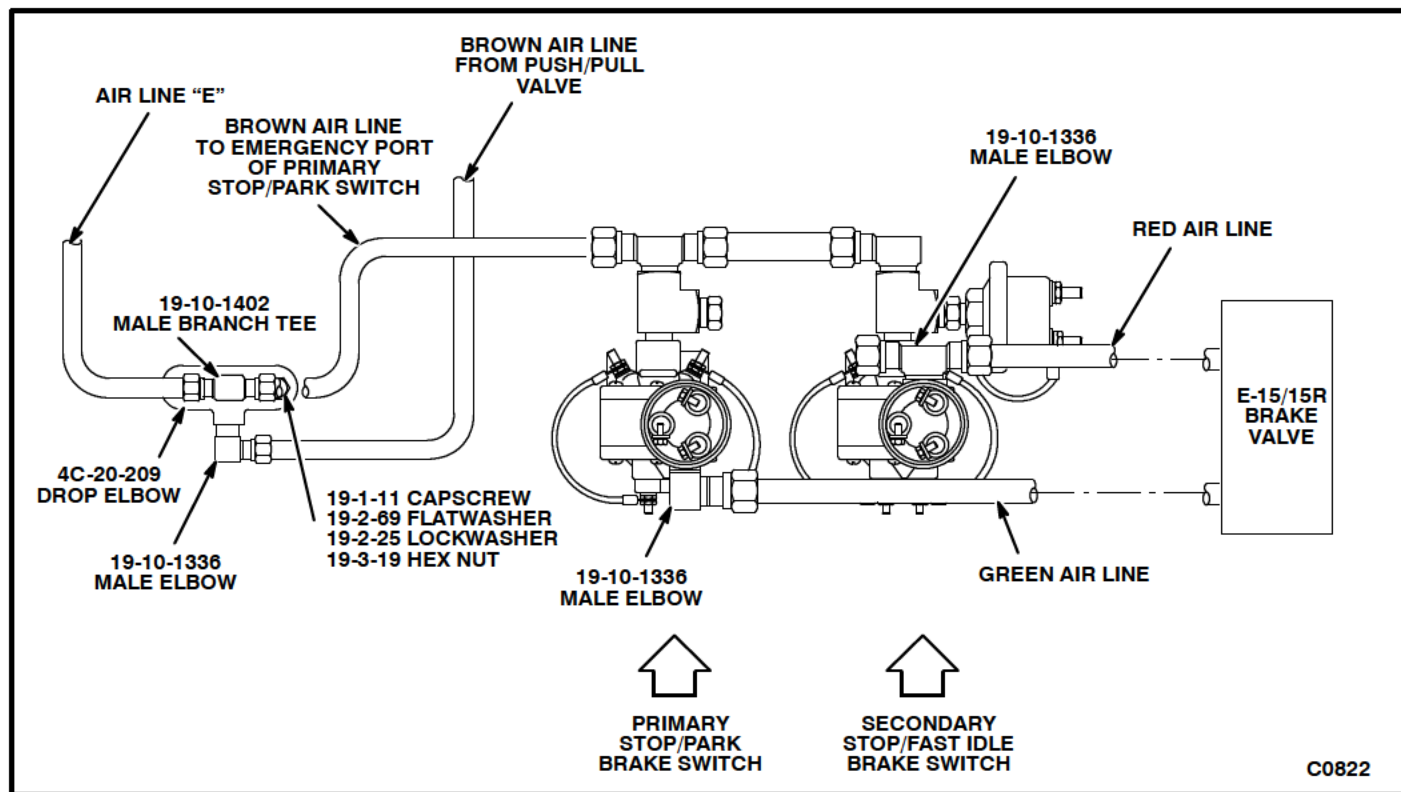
Brake System With E-15/E-15R Brake Valve and Without Parking Brake Interlock.
